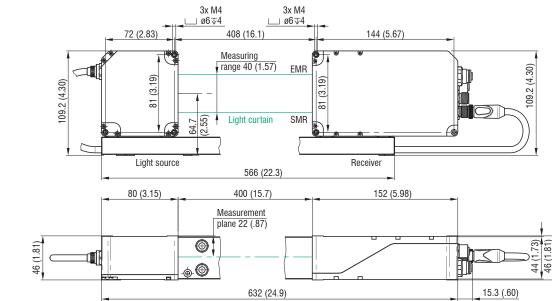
Light source and receiver ODC2700-40(002), dimensions in mm (inches)
